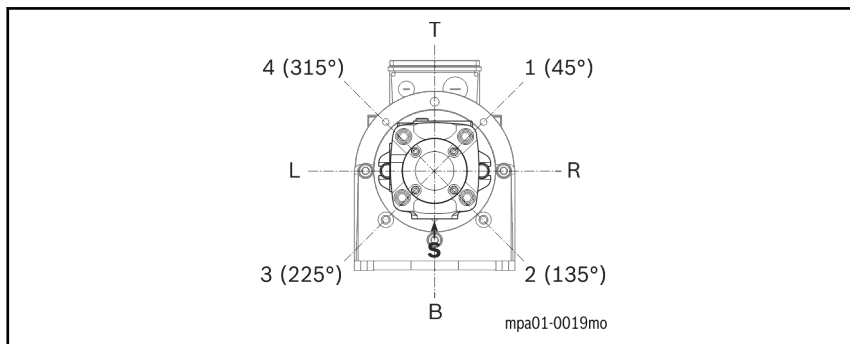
Assemble the motor-pump unit MPA01 composed of components
